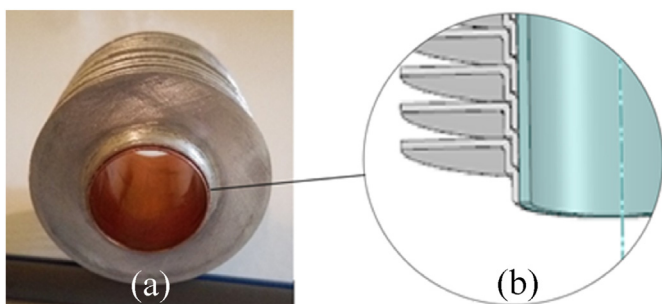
(a) Photo of the finned tube; (b) A cross-section of the tube showing how the flared fin holes overlap.
